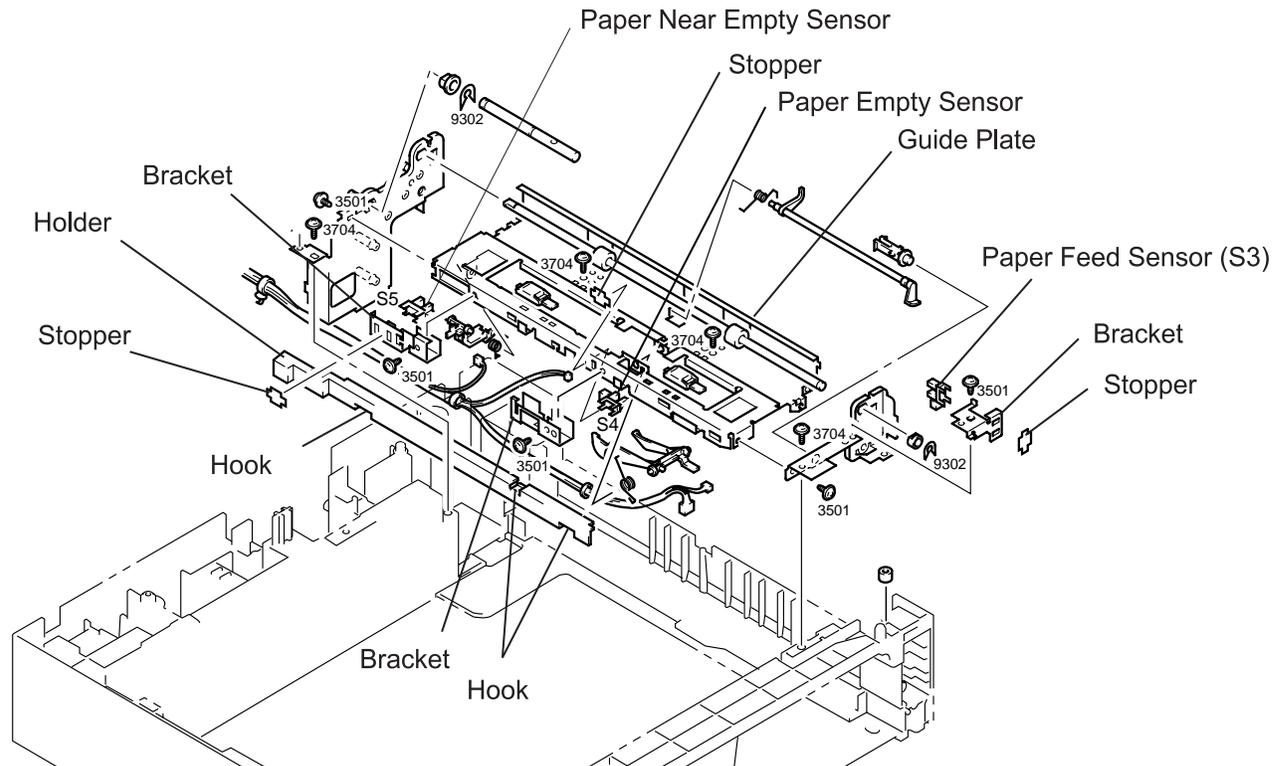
Removal of the Paper Empty / Paper Near Empty / Paper Feed Sensors
